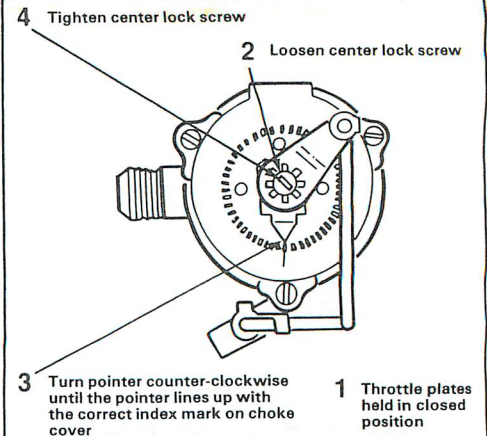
CHOKE MODIFIER ADJUSTMENT
